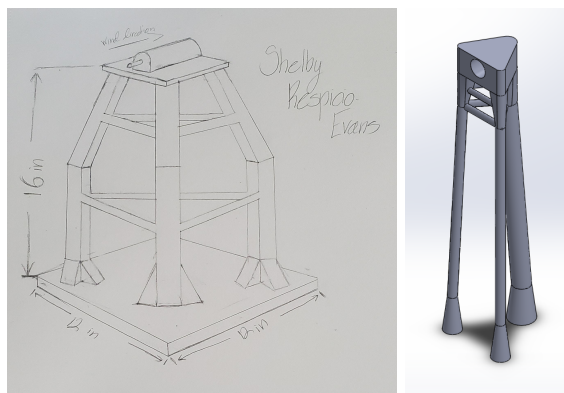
Shelby's concept design drawing. Figure 8b. Shelby's concept design CAD
